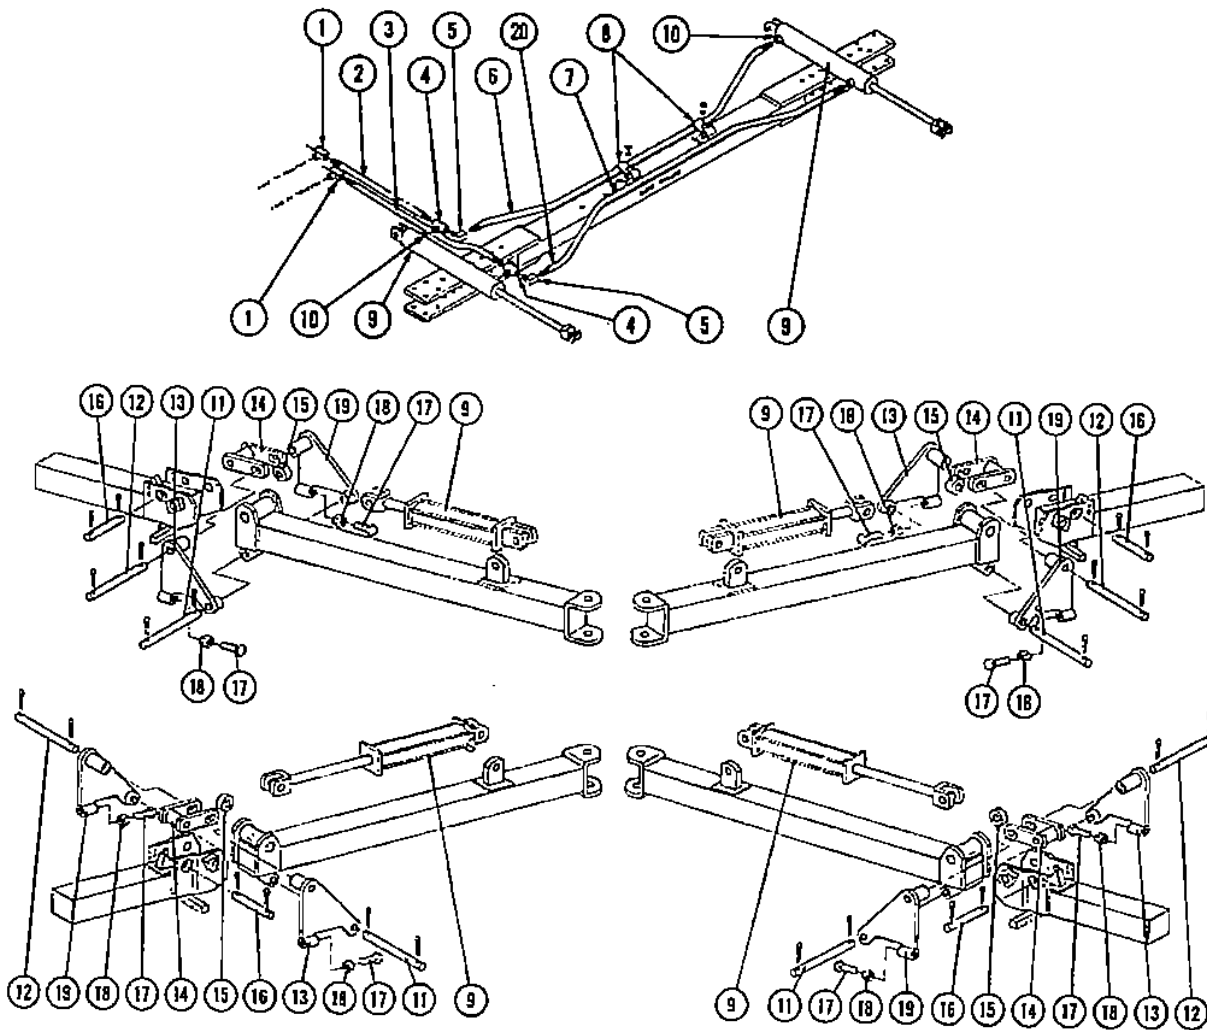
HYDRAULIC FOLDING ATTACHMENT
